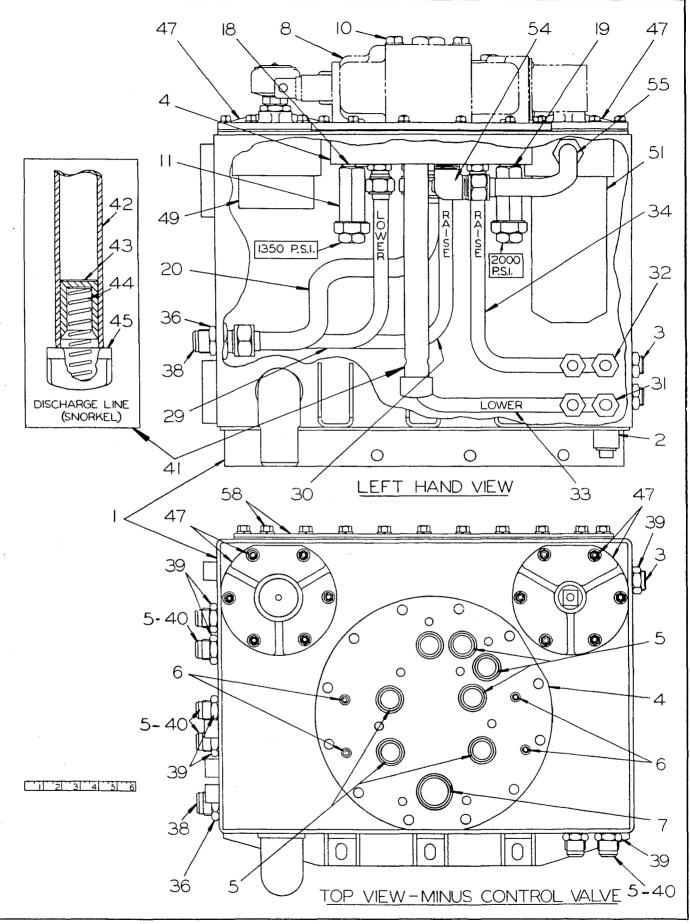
HYDRAULIC TANK GROUP - 2ND HALF
